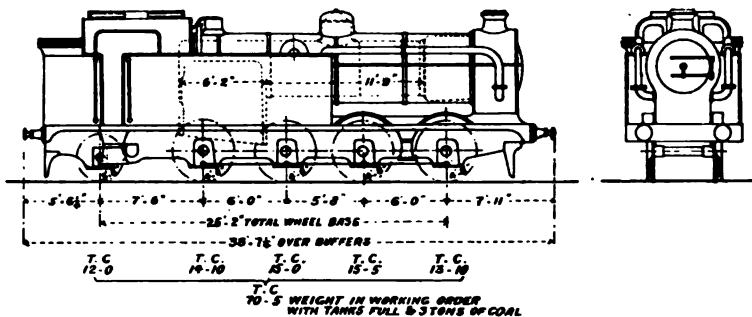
G.N.R. Eight Wheels Coupled Side Tank Engine. (Cylinders, 20 in. by 26 in. stroke.)
